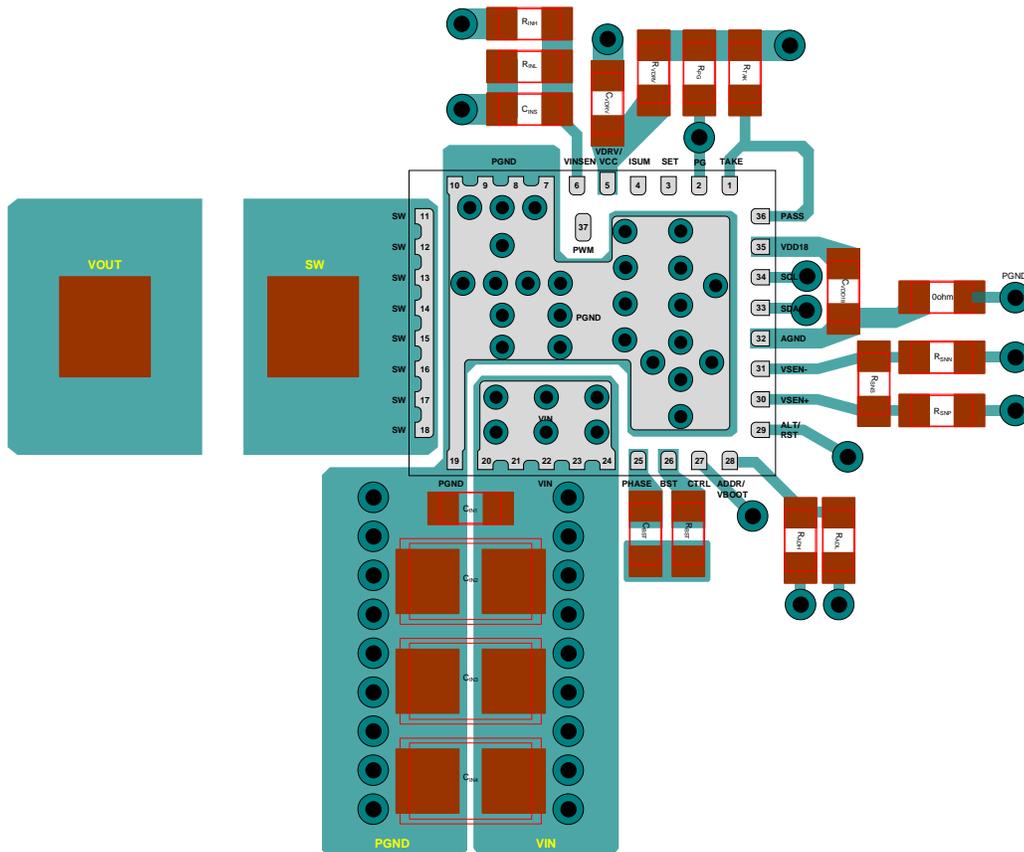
Example of PCB Layout (Placement and Top Layer PCB)
